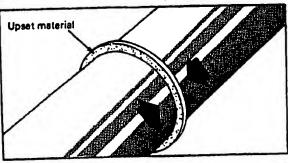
Schematic of the operation of the magnetically impelled arc butt (MIAB) welding process. (From "Magnetically Impelled Arc Butt Welding: Development and Applications" by P. Hone, in *Proceedings of Sheet Metal Welding Conference. III*, organized and sponsored by the Detroit Section of the American Welding Society, 25-27 October 1988, and used with permission.)
